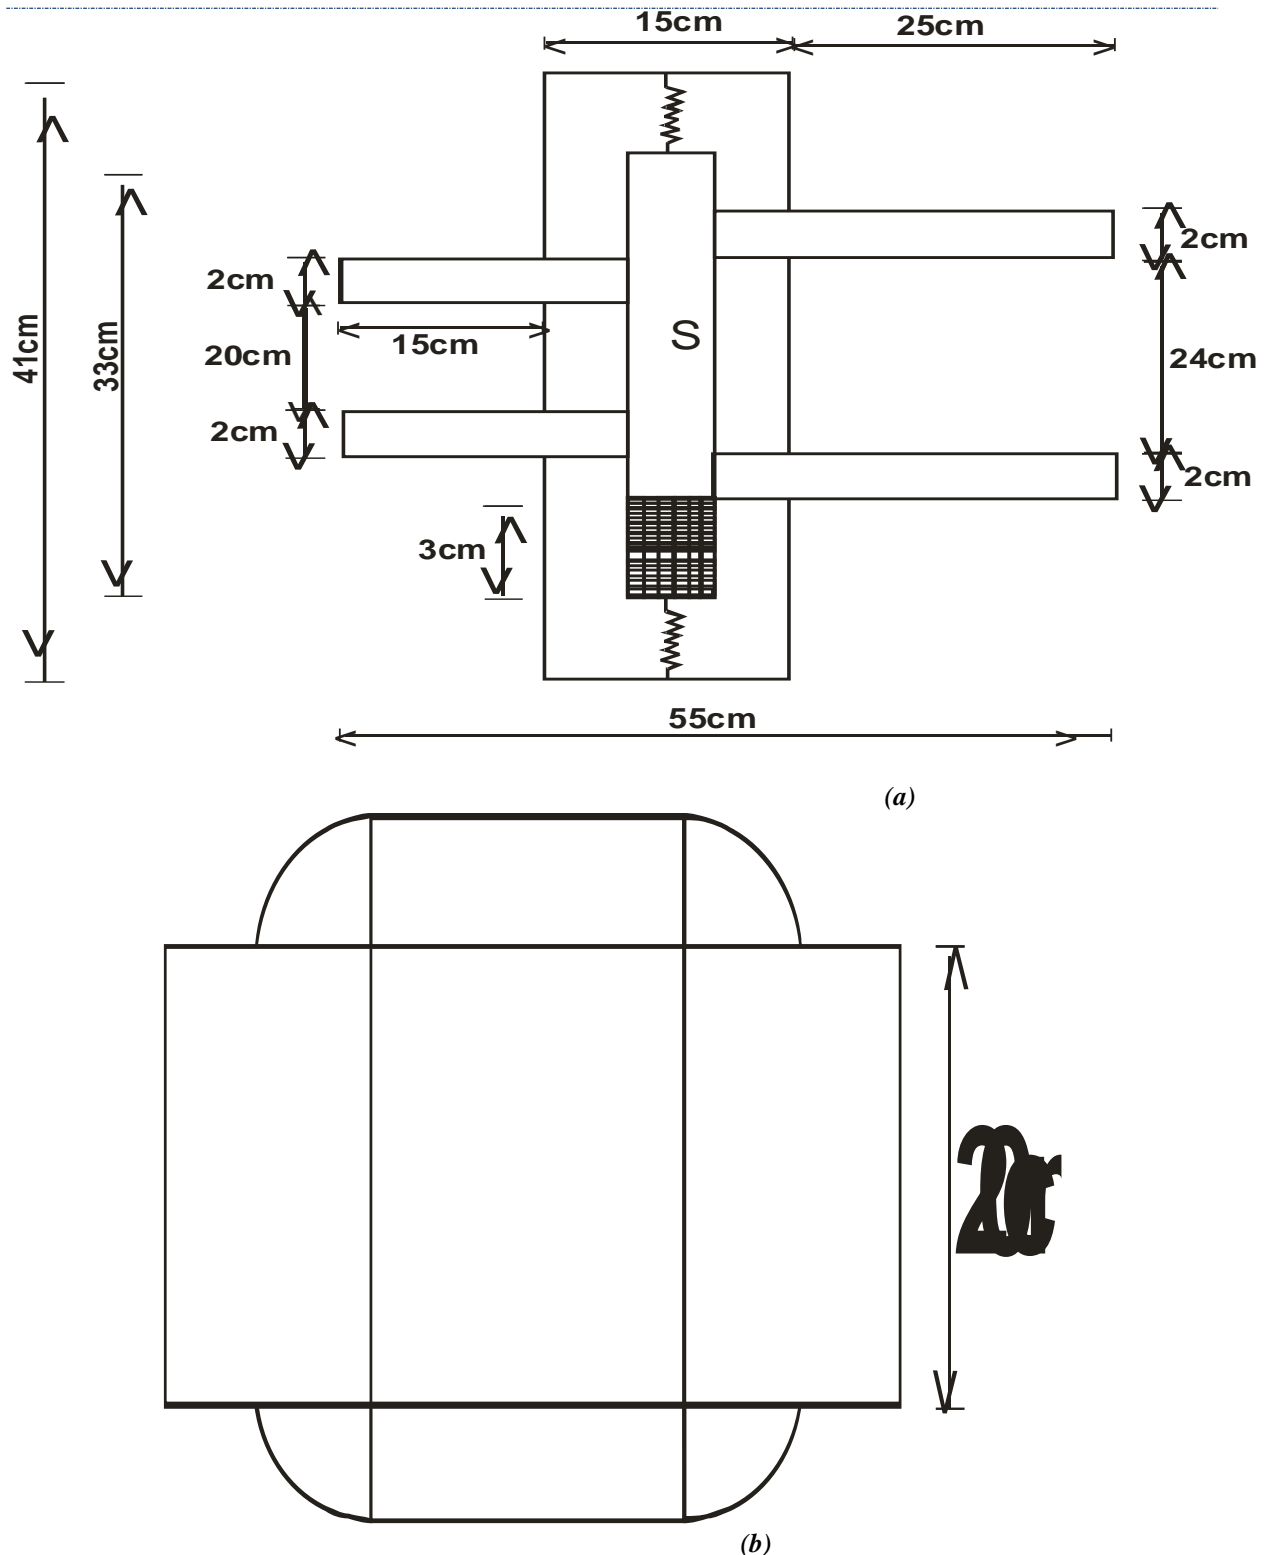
Dimensions (a) for the adapter and (b) for the existing CB terminal
